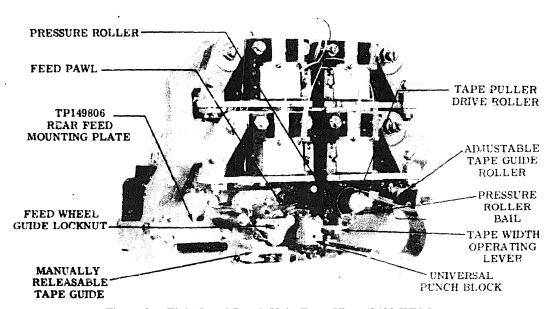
Eight-Level Punch Unit. Front View (2400 WPM)
